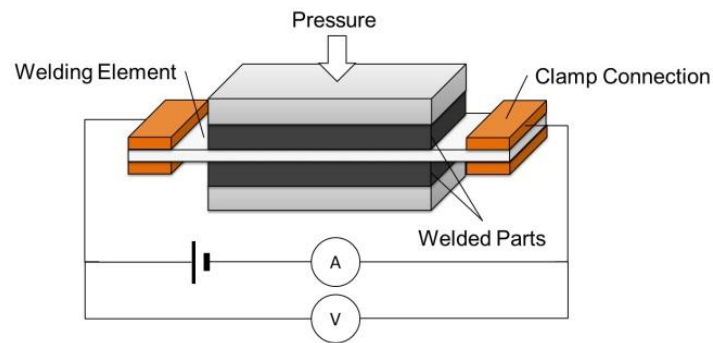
Schematic setup of static resistance welding (adapted from [3]).
